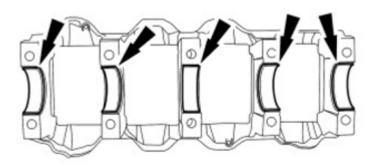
Locating Crankshaft Courtesy of FORD MOTOR CO.
